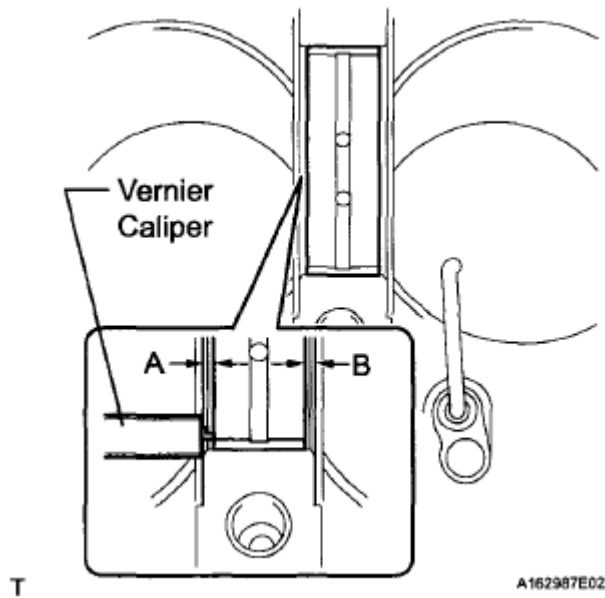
Measuring Distance Between Cylinder Block Edge And Upper Bearing Edge
